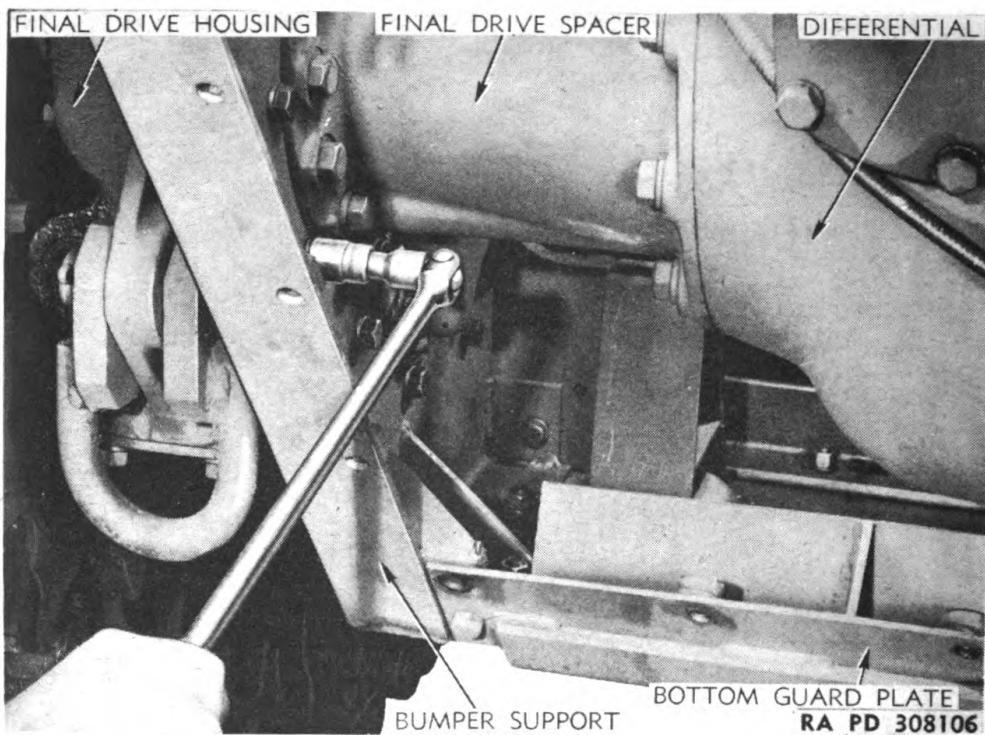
Disconnecting Bumper Supports From Final Drive Housing
